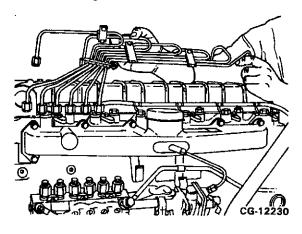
Remove Fuel Injection Lines as an Assembly
